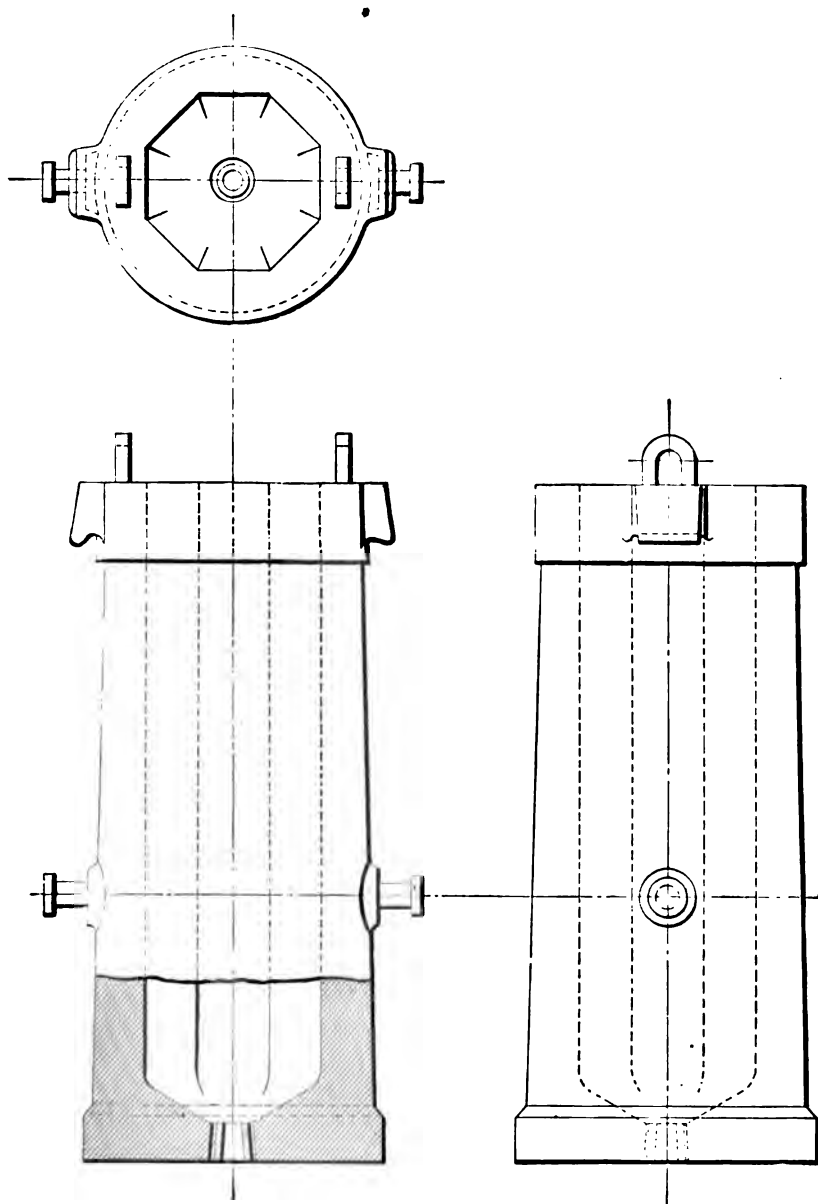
PLAN, PART SECTION AND ELEVATION OF MOLD.
